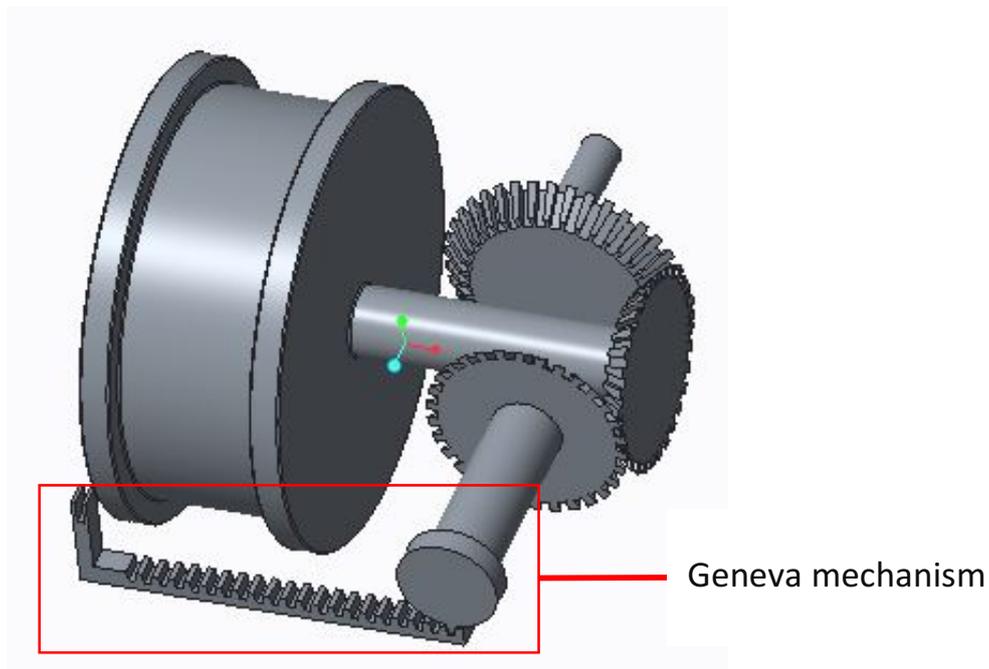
The Geneva mechanism shown on the coiled cable mechanism.
